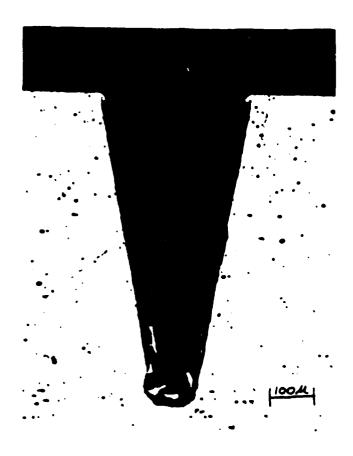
Deepest machined notch (.025 in.). Mean root radius is .0015 - .002 in. 128X.
